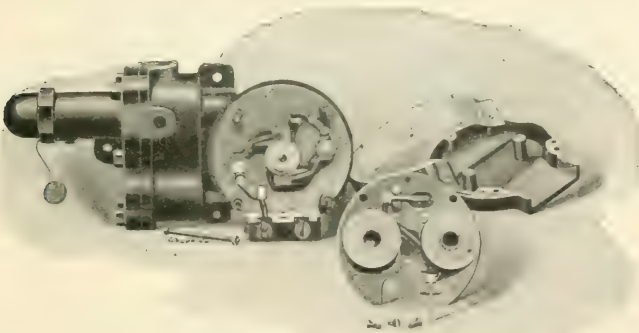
DIAPHRAGM SLIDE VALVE TYPE OF GOVERNOR—
